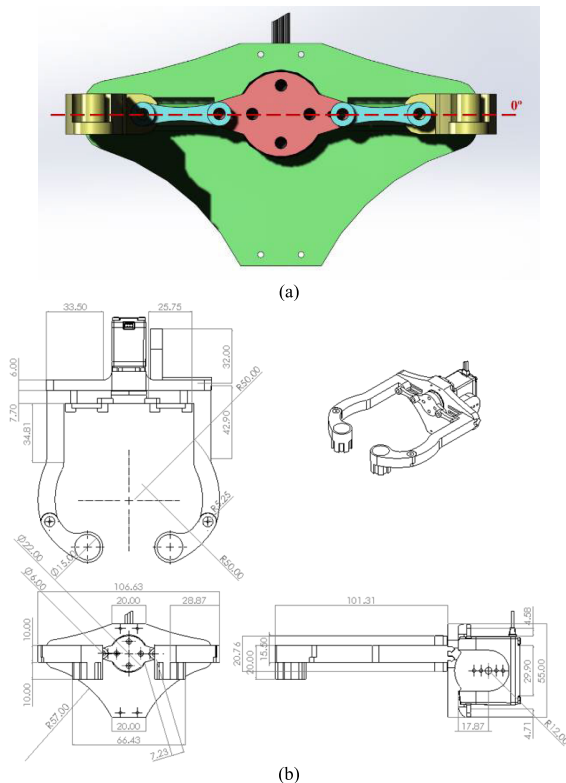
Handheld device design a) SolidWorks assembly of the device b) 2D Drawing of the device.
